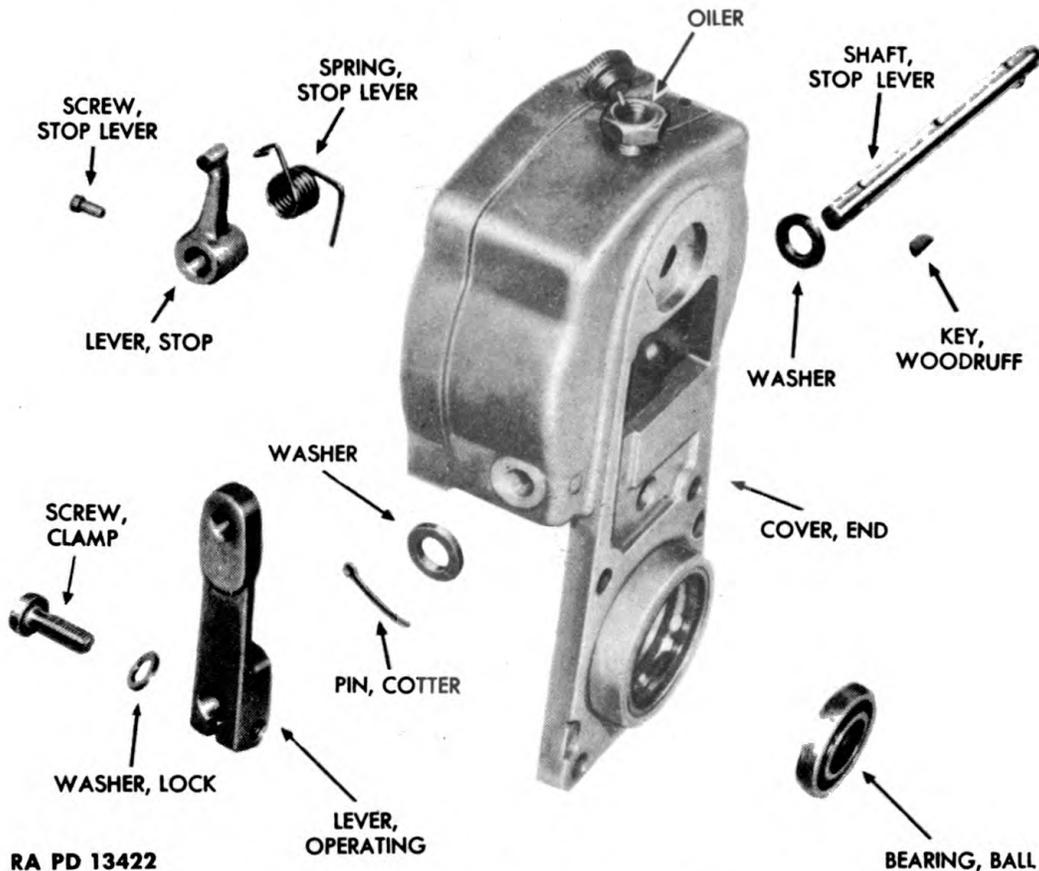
Fuel Pump and Cover Assembly—Exploded View
